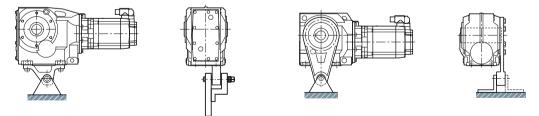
Mounting suggestion for torque arm on foot and flange
